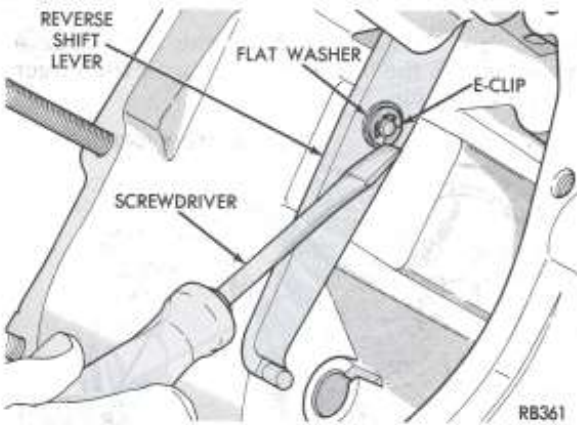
Remove or Install Reverse Shift Lever E-Clip
